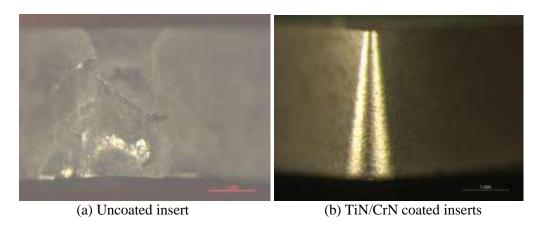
Damage of cutting edges after machining 20 pieces
